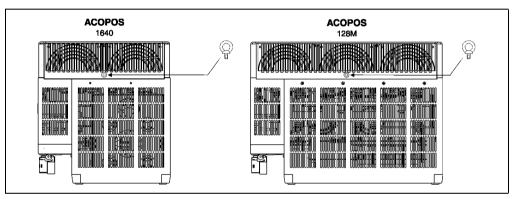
Attaching the eye bolt contained in the delivery to ACOPOS 1640, 128M drives
